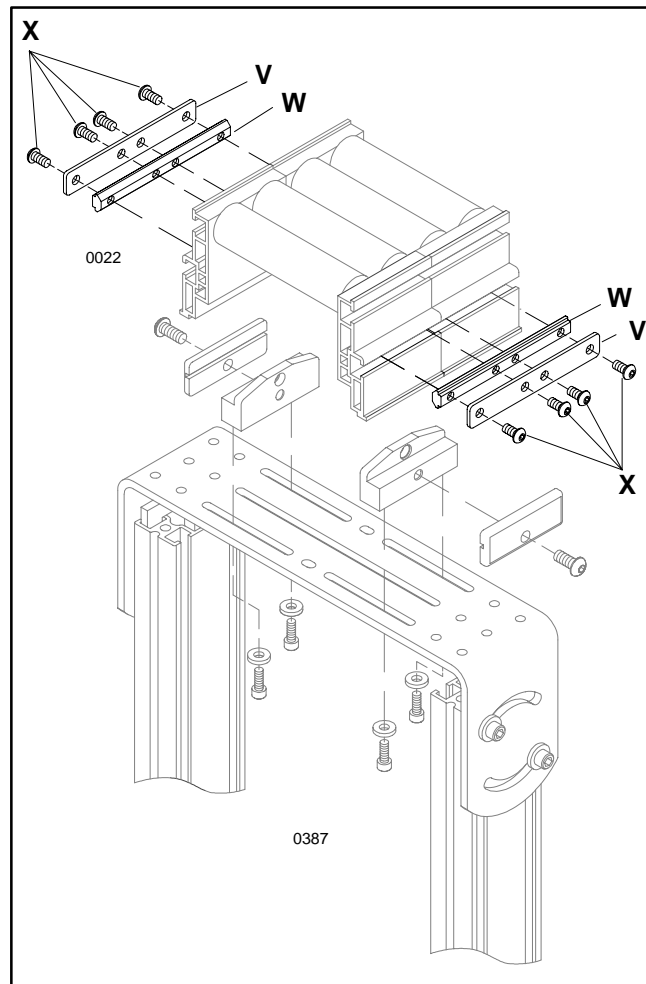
Fully Adjustable Aluminum Stand and Adapting Components for an LPZ style Conveyor
